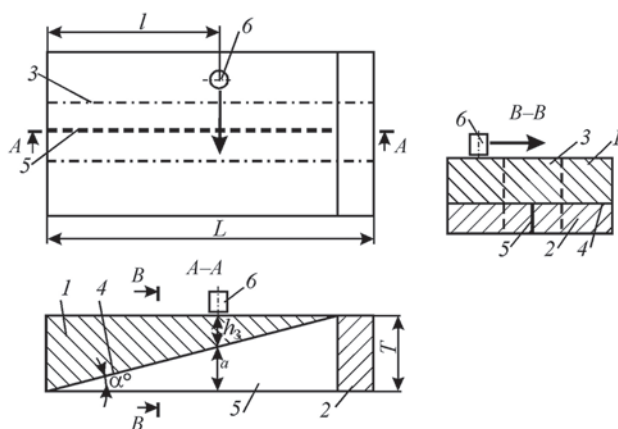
Composite multi-valued RS for simulation of surface and subsurface defects in flat TO with a weld: 1, 2 — wedge-shaped parts; 3 — weld area; 4 — butt; 5 — AD; 6 — ECP
